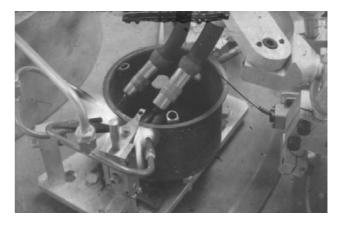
Brazing compressor pots using an acetylene / compressed air burner (Figure 6)
